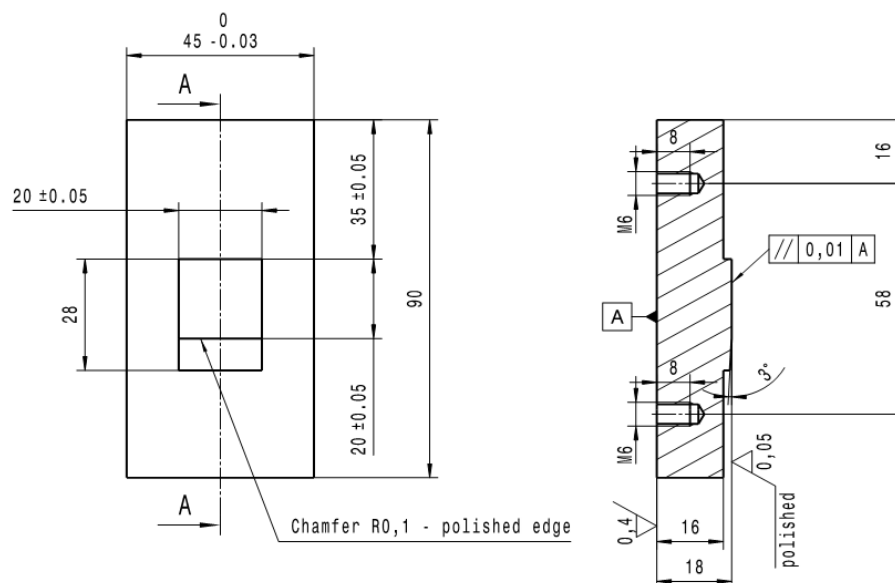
2D drawings of the friction clamping jaws used in the SOKOL 400 tribological test machine (TUL, 2020)
